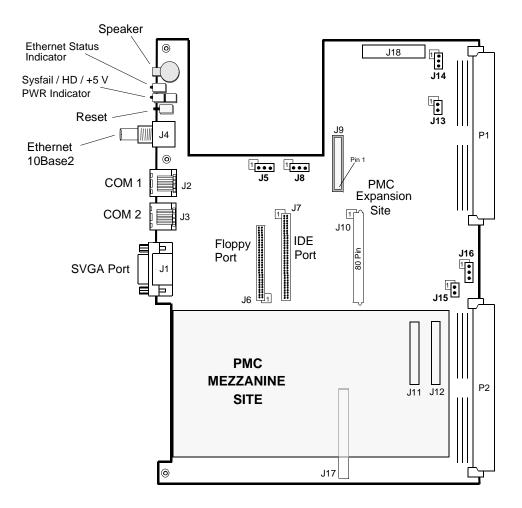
VMIVME-7588 I/O Board Connector Locations
